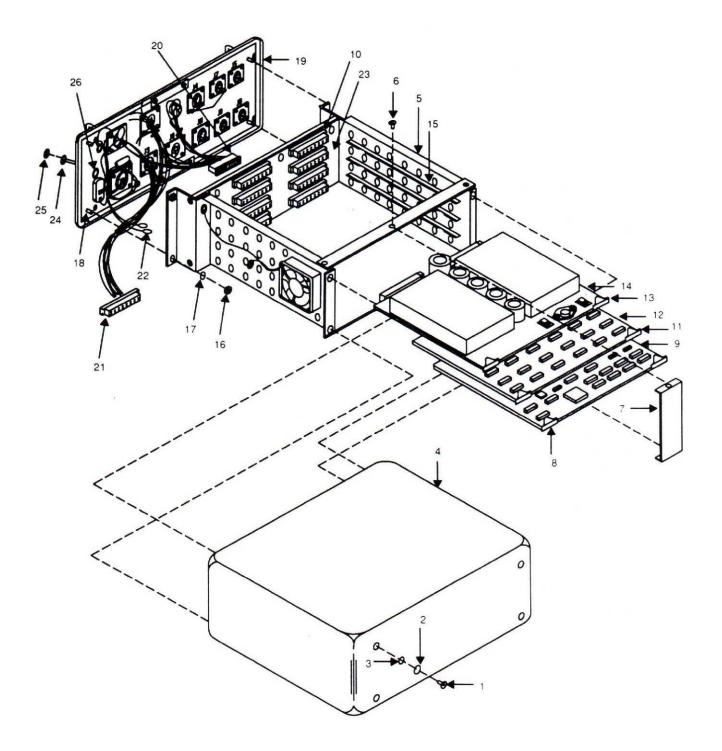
DAU LED Assembly Removal and Installation END OF WORK PACKAGE
